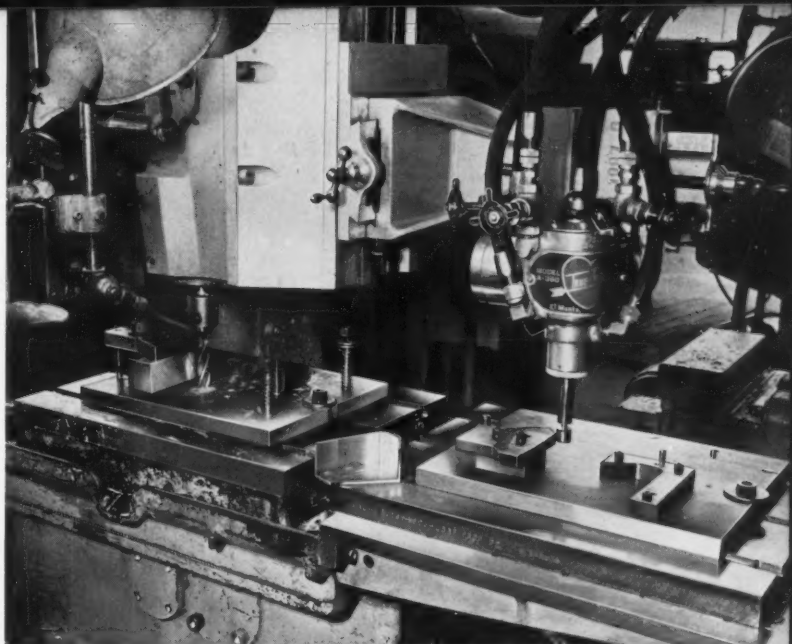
(Above left) View of the tracing unit on the machine shown in the heading illustration, which controls the operation of the cutter in producing spiral cams of the type seen in Fig. 1.
